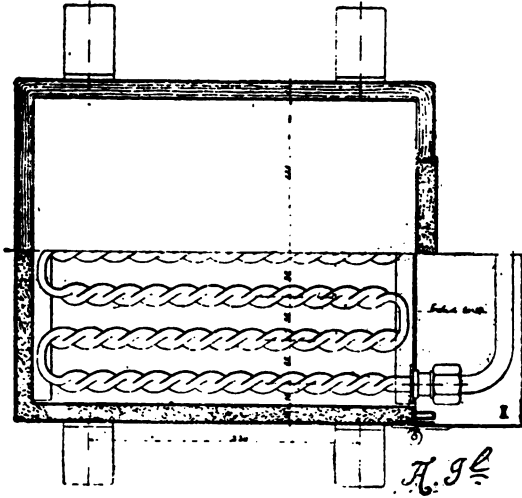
SERPOLLET GENERATOR: PLAN.
